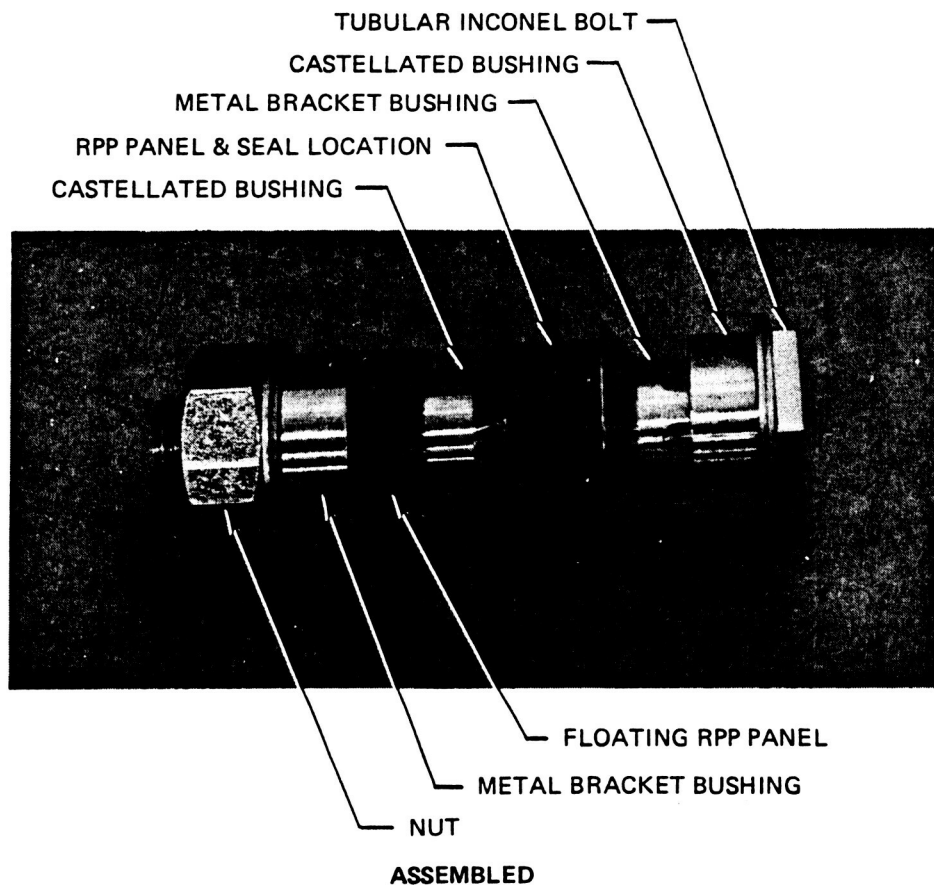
INITIAL SUPPORT LUG — COMPONENT TEST
